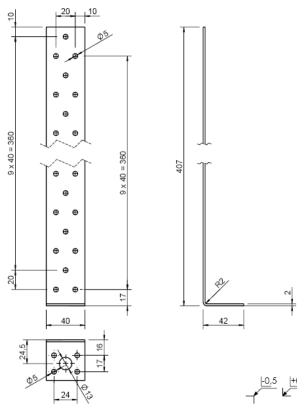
Dimensions of Timber-concrete steel anchor 40 x 400 x 2.00
